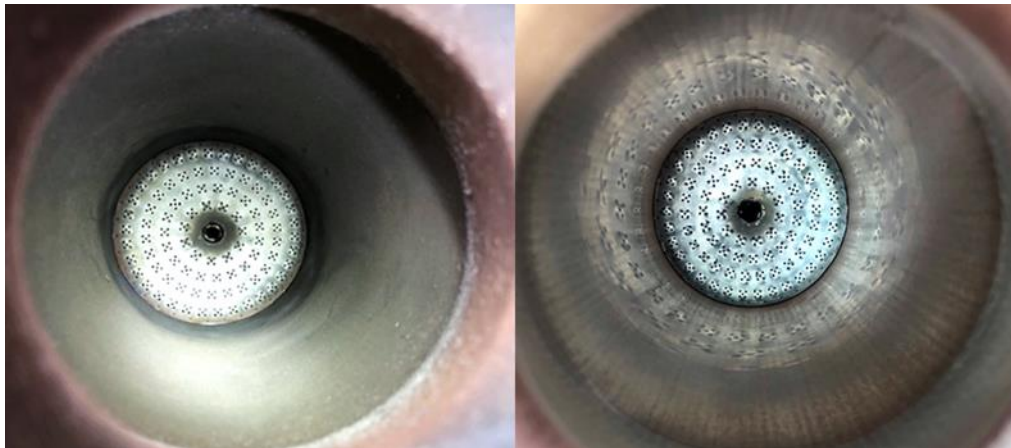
As built hot wall surface finish (left) and final results of honing bit hot wall polishing (right).
